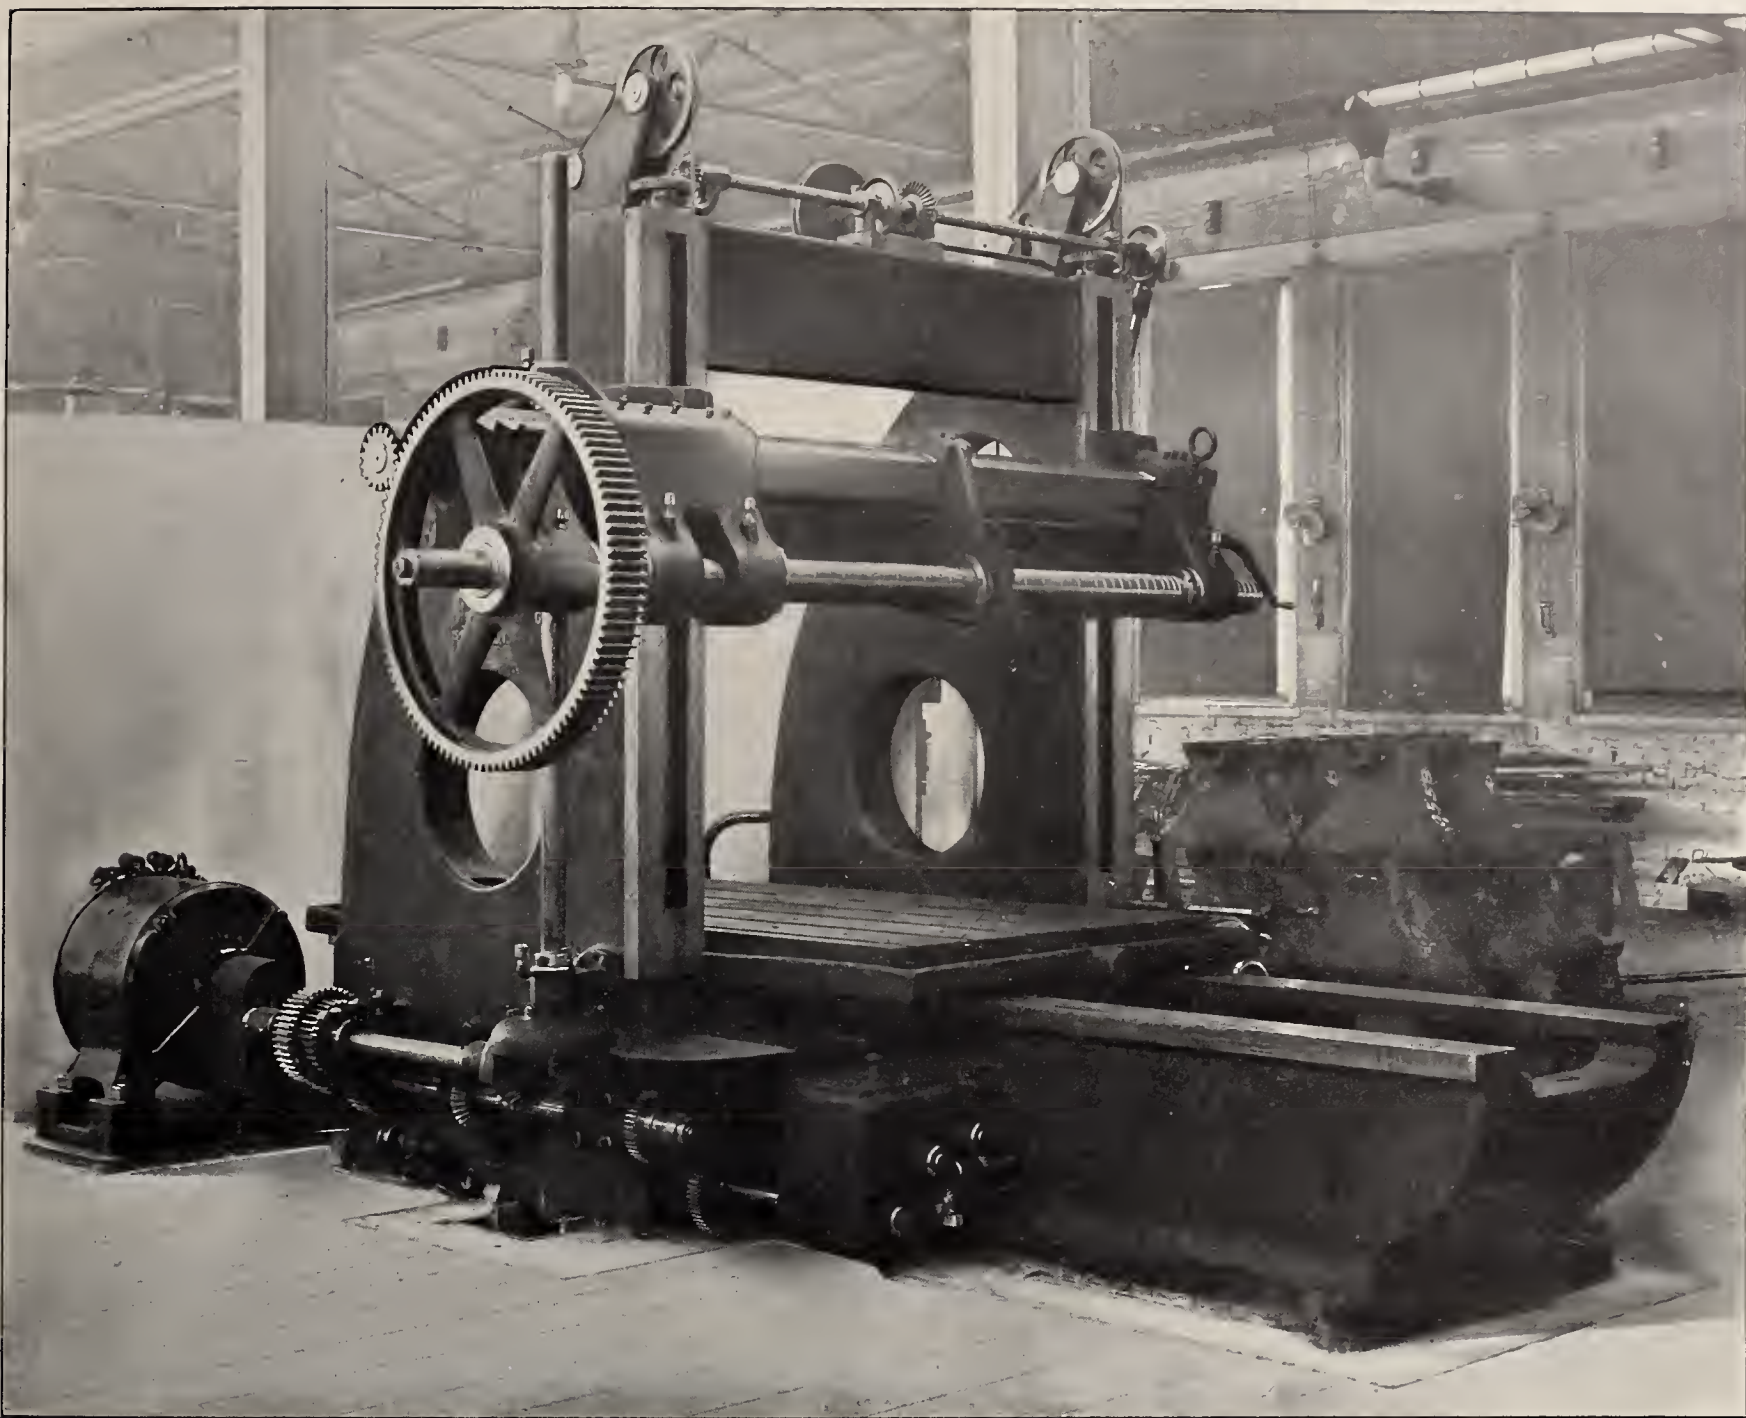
A MOTOR BUILT AT THE BULLOCK SHOPS, AT CINCINNATI, OF THE ALLIS-CHALMERS COMPANY, OPERATING ON THE THREE-WIRE, THREE-VOLTAGE SYSTEM, DRIVING A HORIZONTAL MILLING MACHINE BUILT BY THE INGERSOLL MILLING MACHINE CO., ROCKFORD, ILL.
